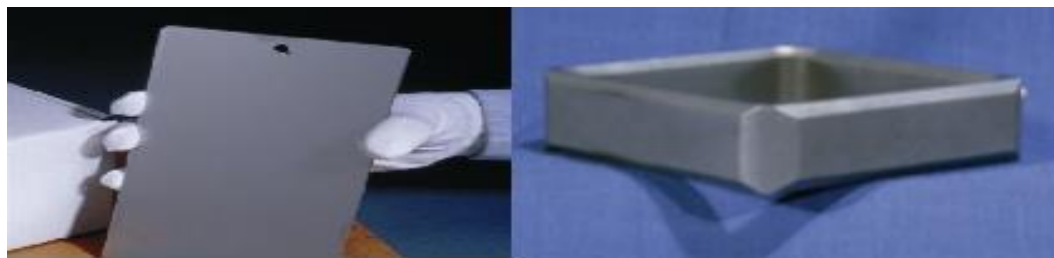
Aluminum Plate and Drawing Apparatus Used In The Coating Stage
